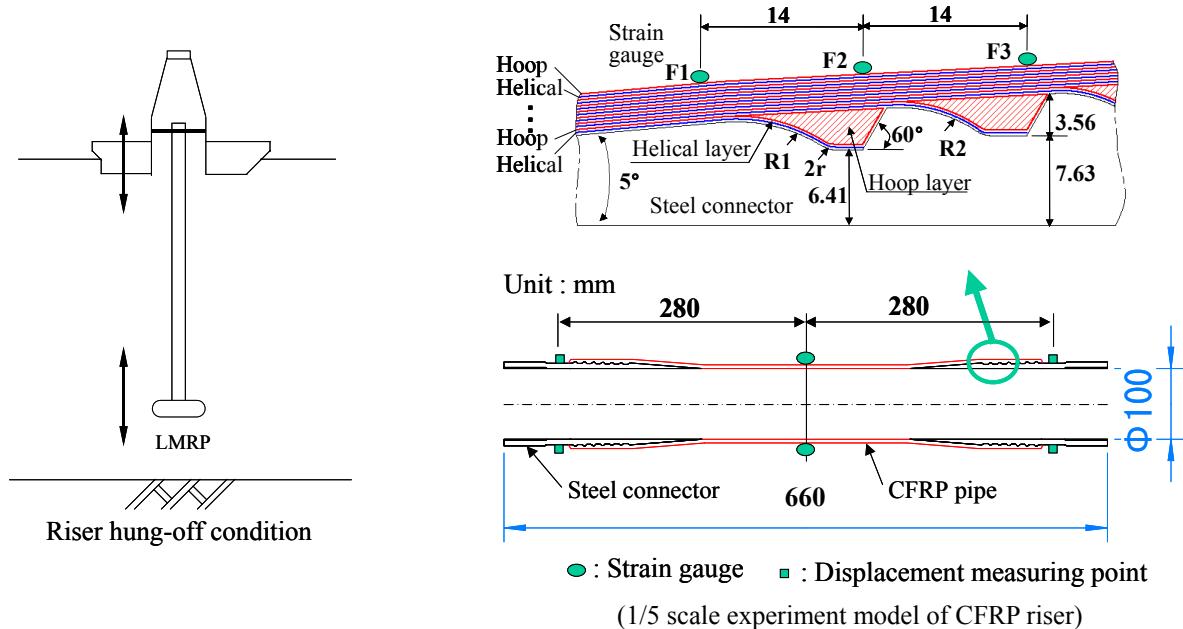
Riser hung-off condition and connecting part of CFRP pipe and steel connector
